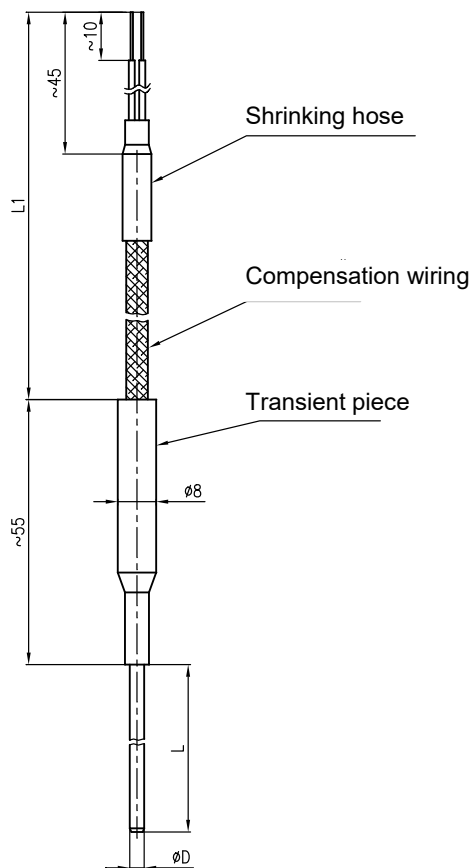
DIMENSIONAL DRAWING - DESIGN B
